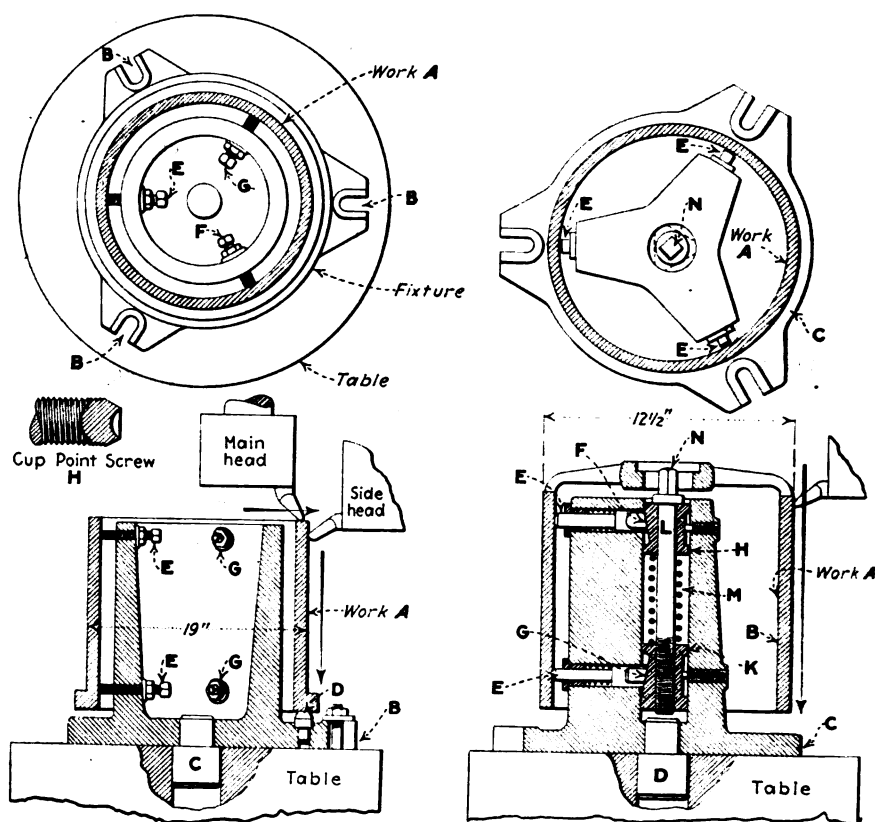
(LEFT). VERTICAL TURRET LATHE FIXTURE FOR DRUM. FIG. 391 (RIGHT). PIN CHUCK FOR ELECTRICAL UNIT
